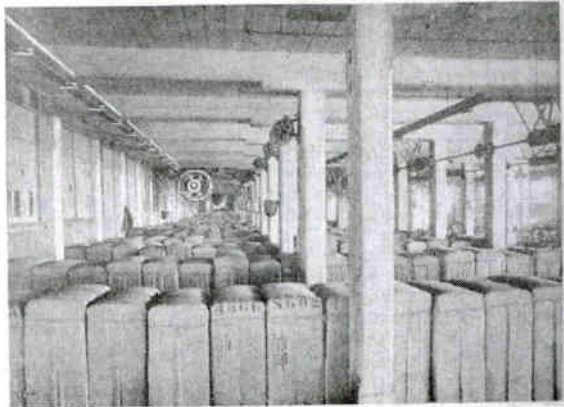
View in Basement Showing Motors for Operating Machines in Weave Room Located on Floor Above. Proximity Mill
